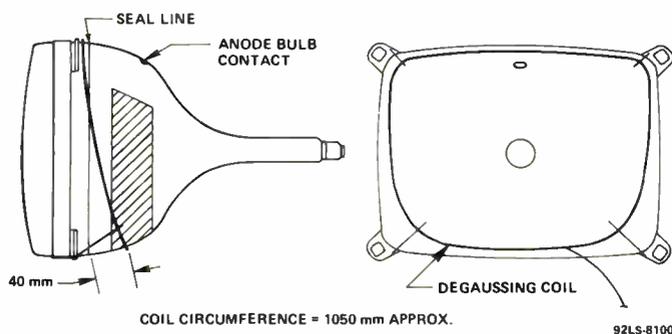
Relative Placement of Typical Tilted "Z" Degaussing Coil
